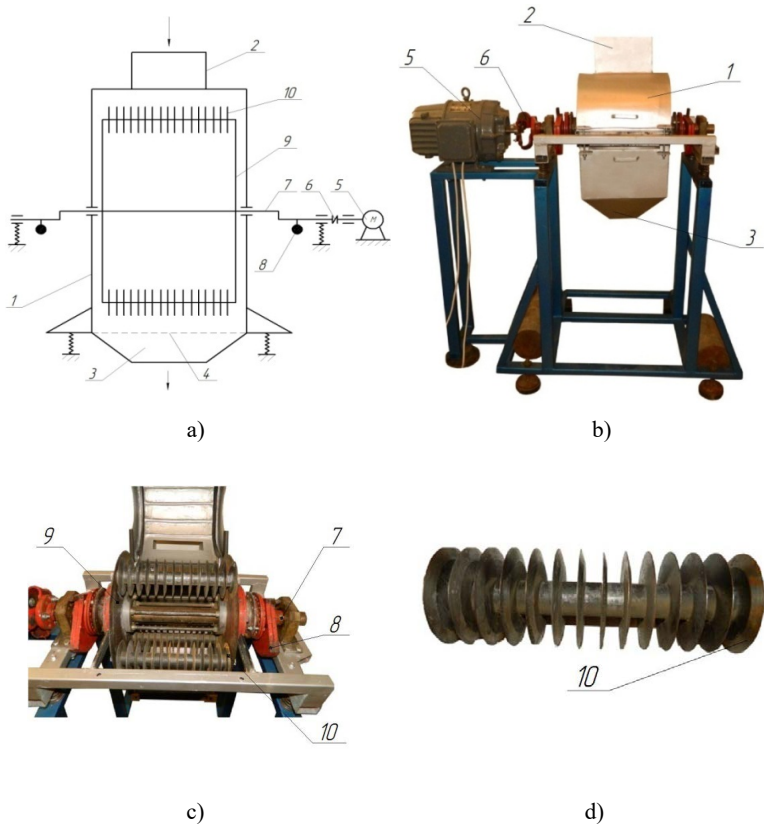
Vibratory disc crusher: a) schematic diagram; b) general view; c) actuator; d) disk beaters; 1 – housing; 2, 3 – loading and unloading neck; 4 – sieve; 5 – electric motor; 6 – elastic clutch; 7 – kinematic shaft; 8 – counterweights; 9 – rotor; 10 – disk-type beaters
